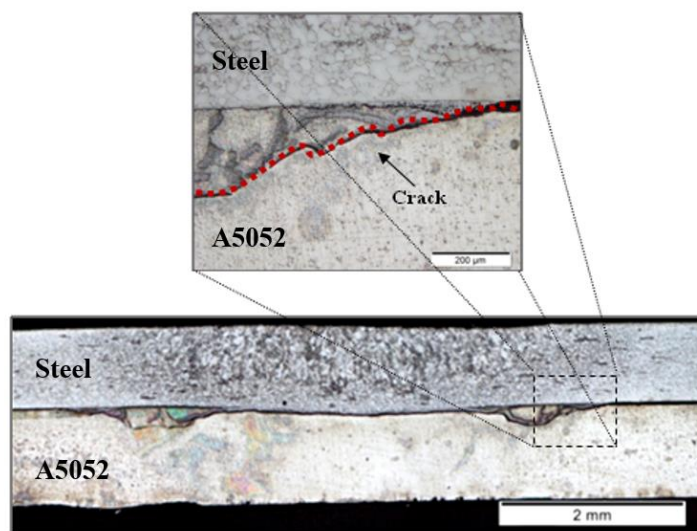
Example of crack found in welds obtained with applying 140 A of welding current.
